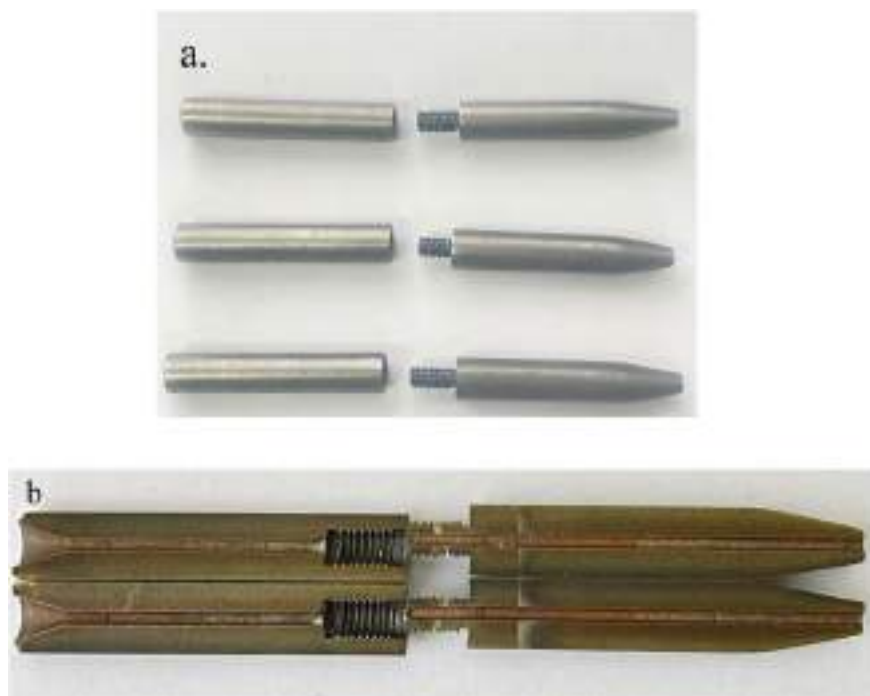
3D printed consisting both inlet and outlet parts (a) cross section of printed nozzles (b)
